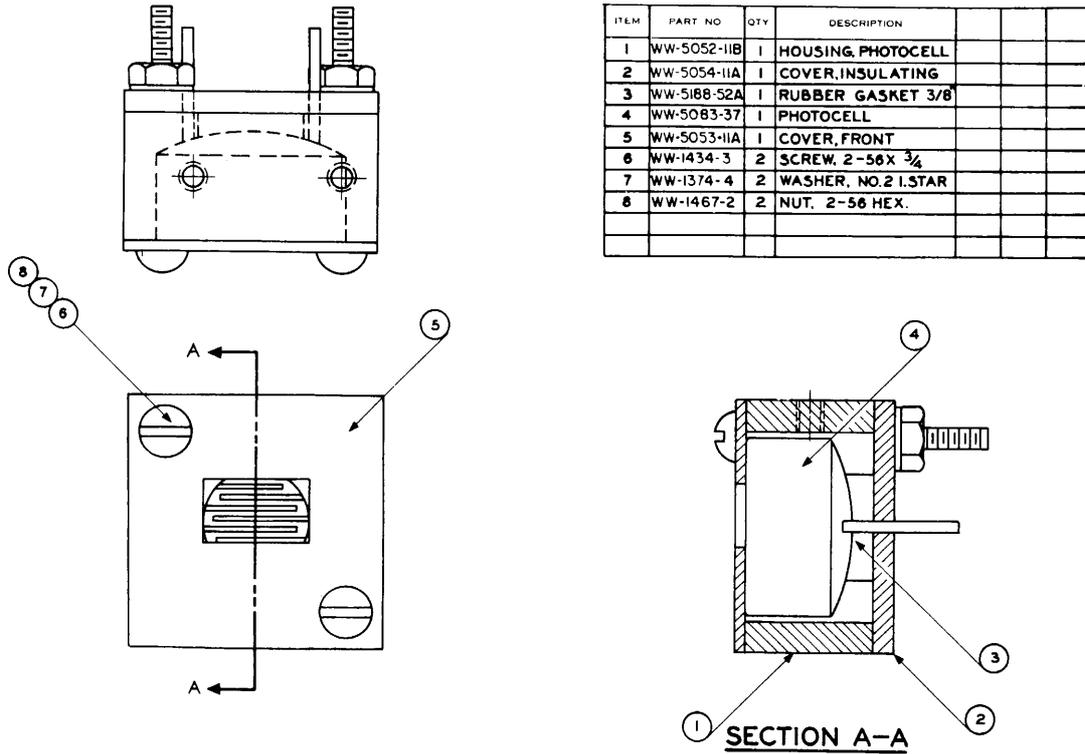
Photocell housing assembly, WW-5184-1B (part of motorboard assembly, figure 6).
